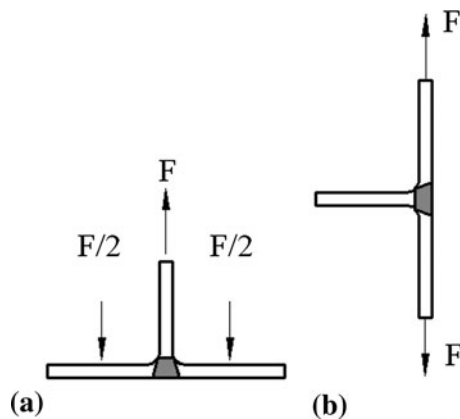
The shape and structure of FSW T-welded joint
